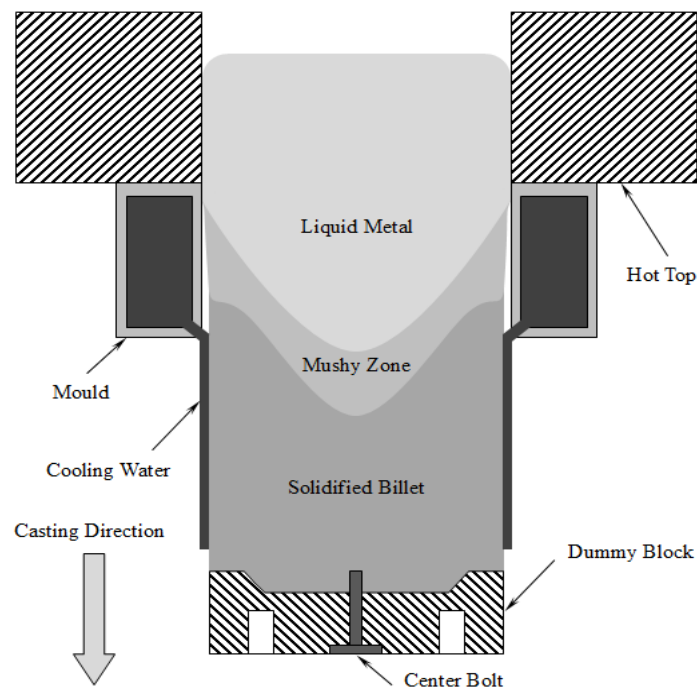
Schematic DC casting process used for magnesium billet casting [93].
